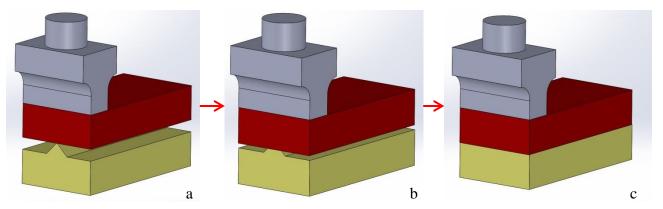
Ultrasonic welding progression (a) horn starts to oscillate; (b) the weld pool is moving through the energy director, (c) the welding is complete with a bond of the two layers (Figure 3.1f). This entire process continues to iterate layer after layer until the process is complete.
